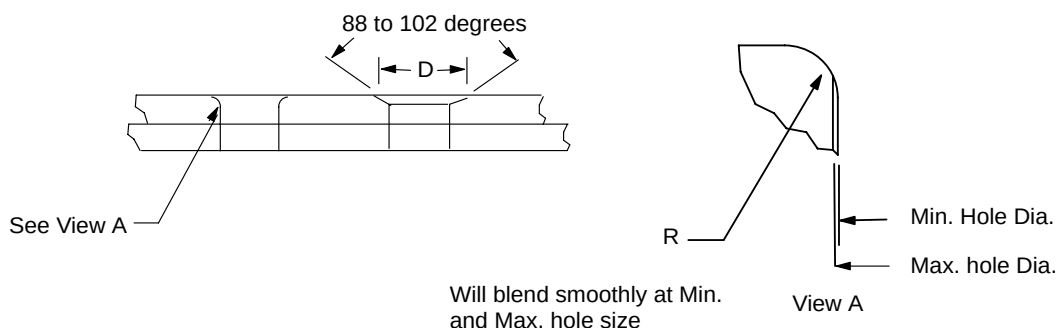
HOLE RADII AND CHAMFER FOR PROTRUDING HEAD FASTENER
